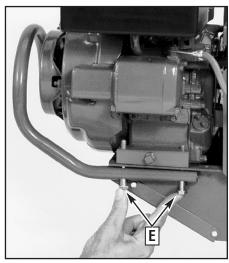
Install screws (E), lock washers and nuts on right side. Tighten securely. Then tighten all remaining screws.
